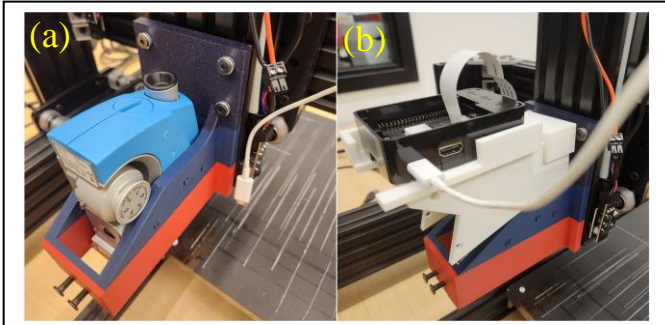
(a) Mounting assembly for the coating thickness measurement tool on the CNC machine (in scanning mode; the ocular lens is visible). (b) Assembly including the Raspberry Pi and the camera placed over the ocular lens.
